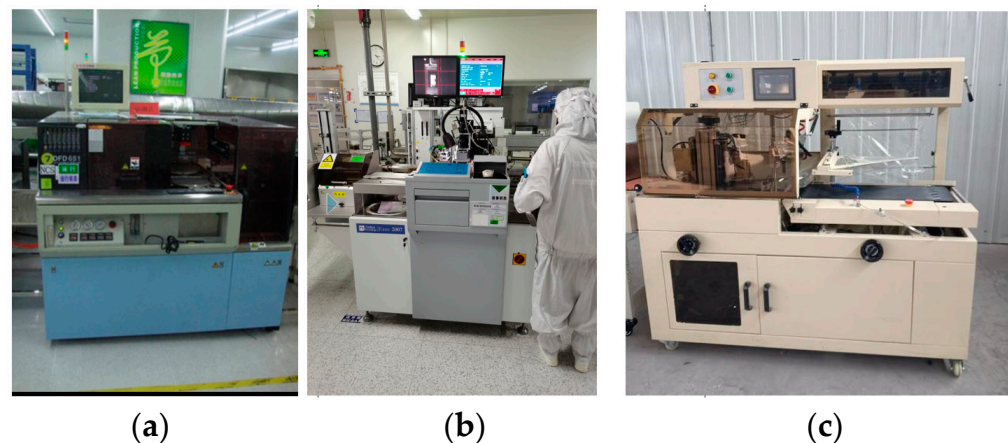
Physical equipment of CPW: (a) dicing machine; (b) chip loading machine; (c) PC plastic sealing machine.
